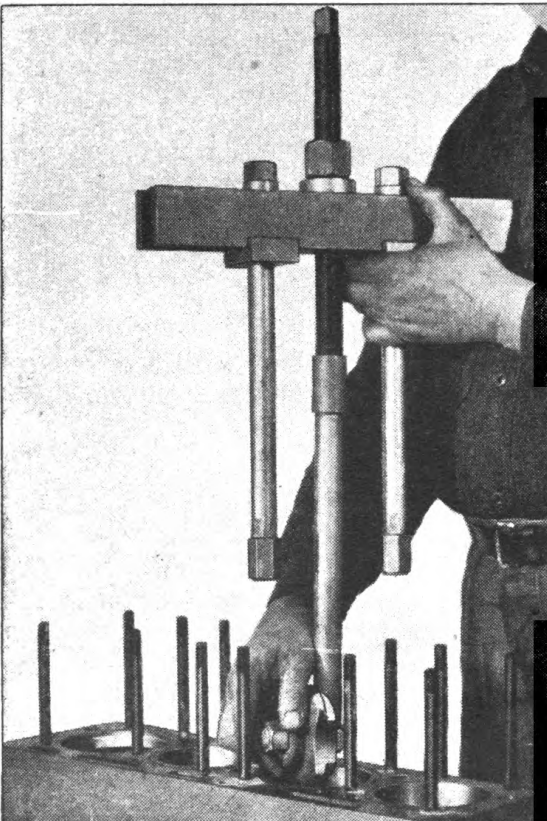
Inserting Puller into Cylinder Barrel Preparatory to Pulling. This is a Combination of Owatonna Tool Co. Tools—other Standard Tools will do as well.
